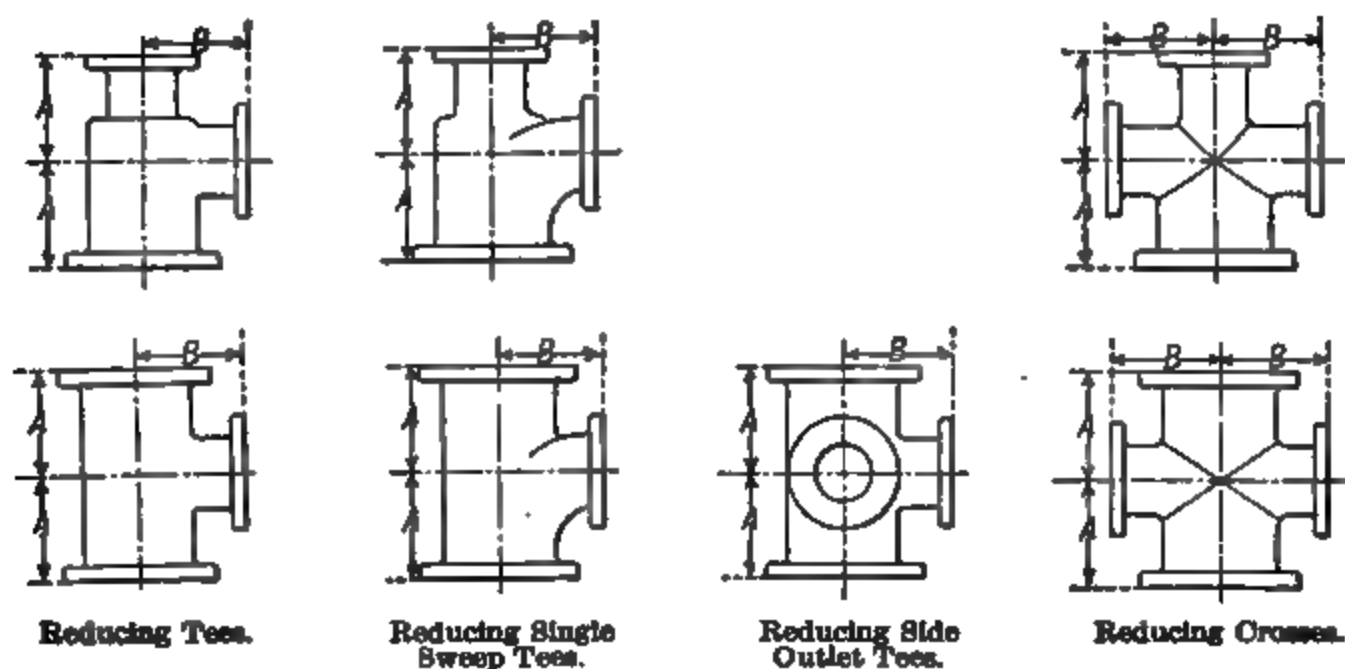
STANDARD AND EXTRA HEAVY REDUCING FLANGED FITTINGS
